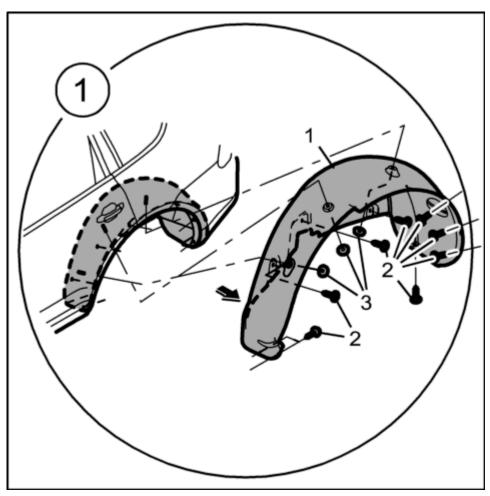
Rear wheel housing liner mount Courtesy of PORSCHE OF NORTH AMERICA, INC.
